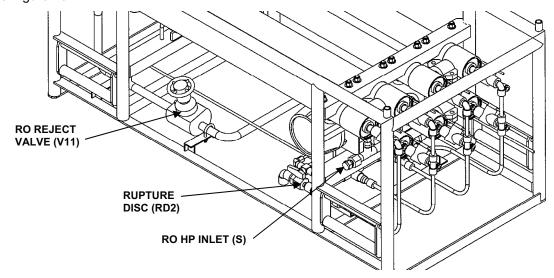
RO Module High-Pressure Inlet Hose Connection.
